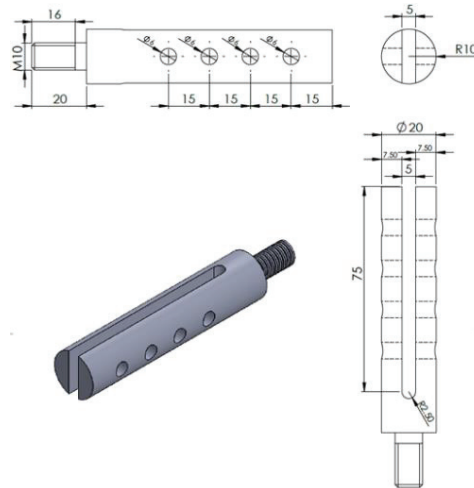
Technical drawing of TSHPB transmitter bar clamp apparatus
